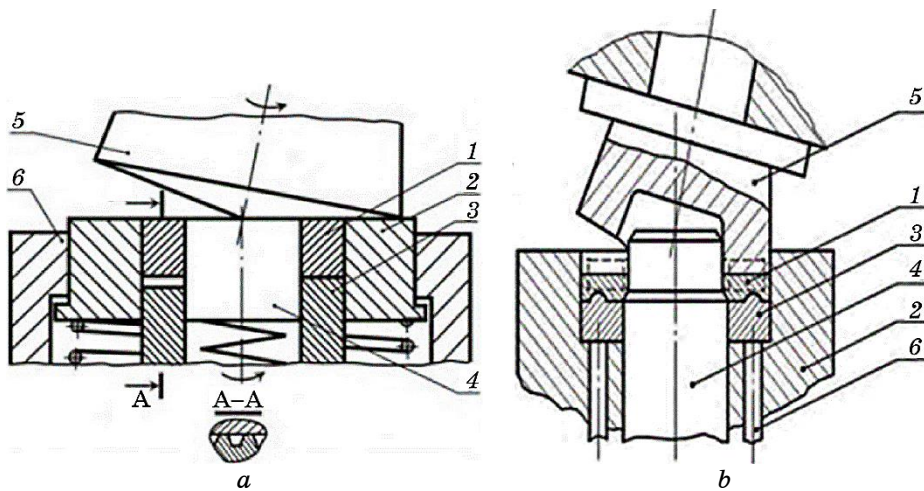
Technological schemes of direct extrusion of the profile on the end of the workpiece by OF method: in a spring-loaded die and mandrel (*a*), in the die calibre of the stamp (*b*).
